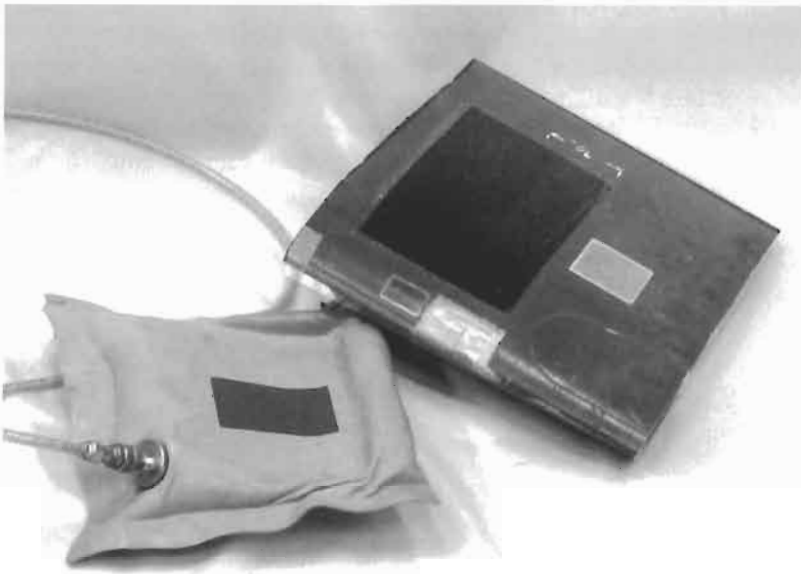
Photograph of vacuum moulding tool demonstrating manufacture of a composite repair for the leading edge of a rotor blade.
